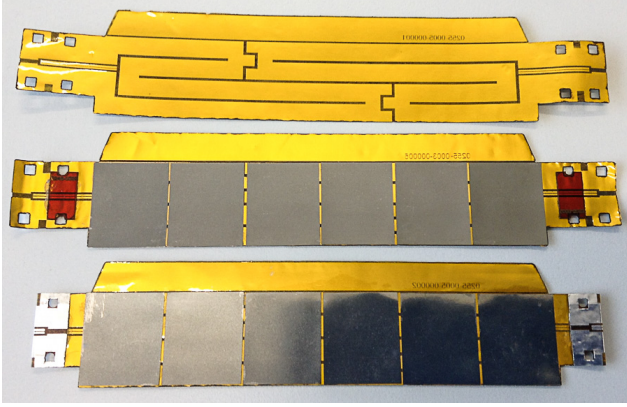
Tape heaters for layer 1 and 2. Top to bottom: bare heater with meander, stiffener attached to match final dimensions, dummy chips glued on. Large contact pad pair on both ends used for powering. Chip size $20 \times 23 \text{ mm}^2$.
